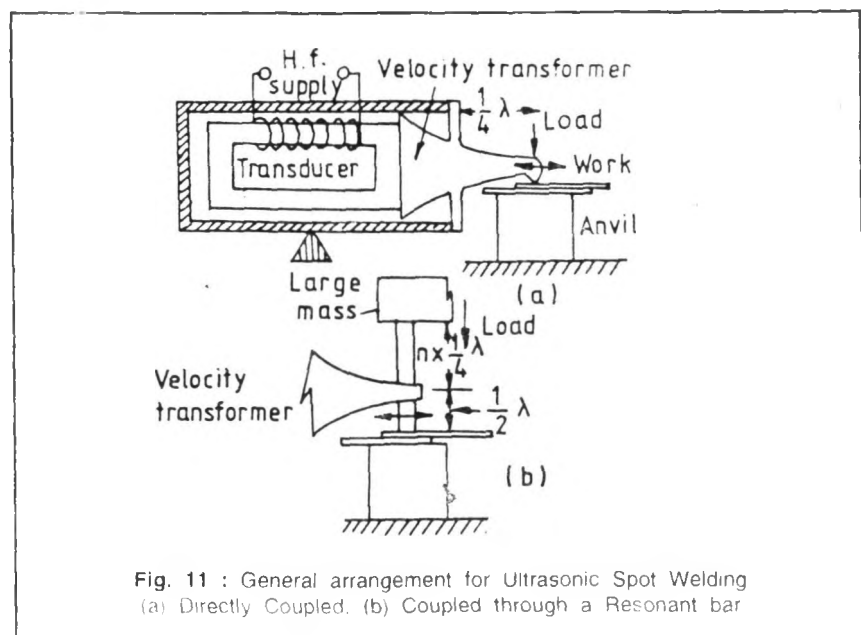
General arrangement for Ultrasonic Spot Welding
